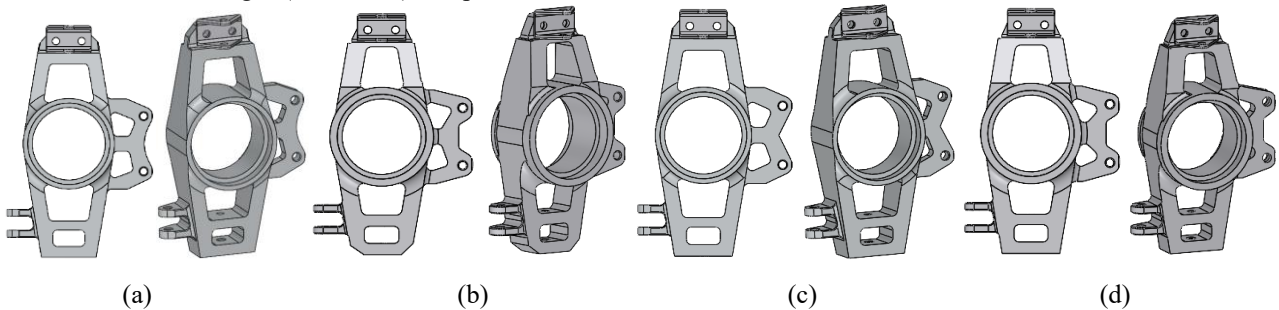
Optimized front knuckle geometry and bracket assembly: (a) 7075 T6 Aluminum - ANSYS, (b) 7075 T6 Aluminum - SolidWorks, (c) Alumold Aluminum - ANSYS, and (d) Alumold Aluminum - SolidWorks
